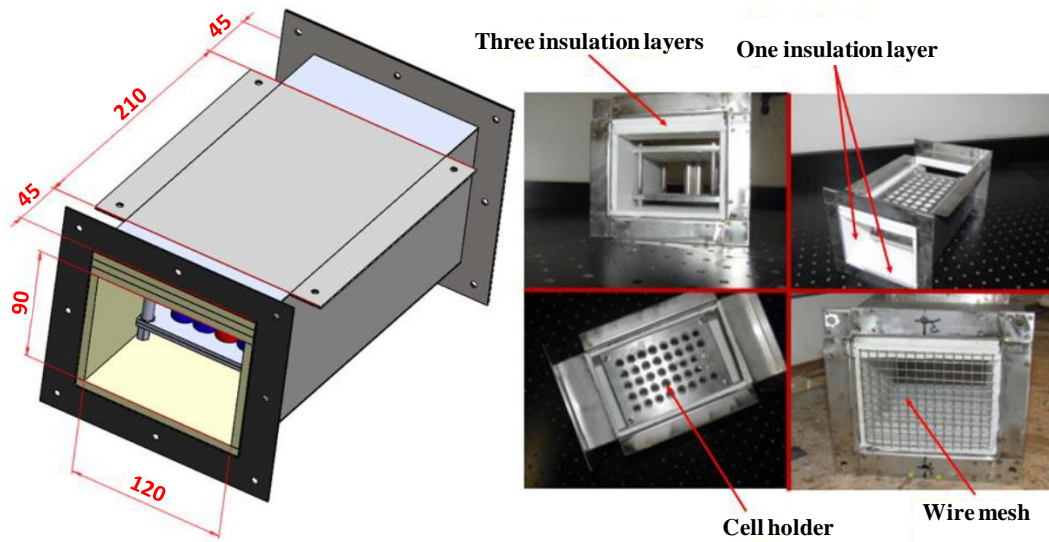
Dimensioned (in mm) schematic of the test section (left), and labeled photographs of the test section outlining key features (right).
